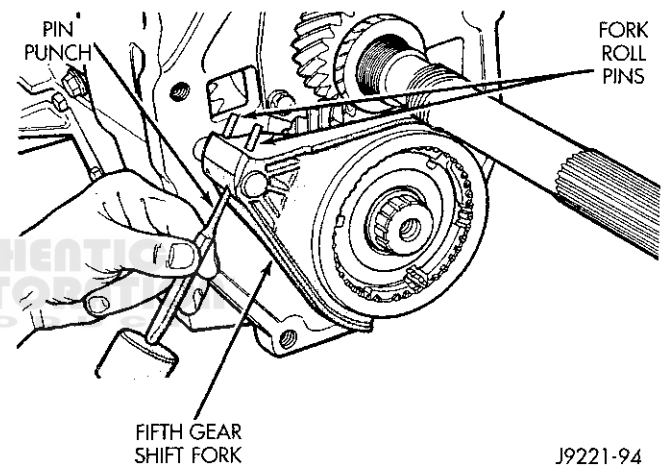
Removing Fifth Gear Shift Fork Roll Pins
